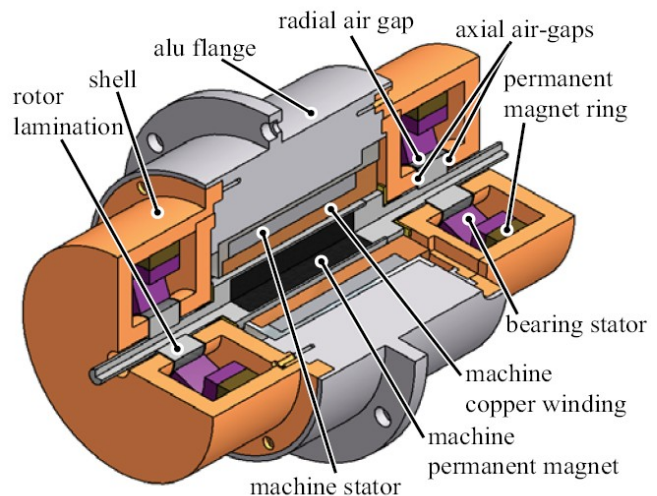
Cut-away view of the electrical drive and the two radial-axial bearing units mounted on two sides.
